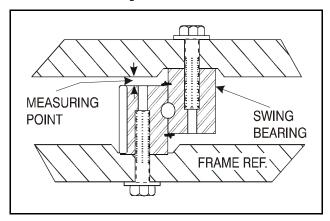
Swing Bearing Tolerance Measuring Point
